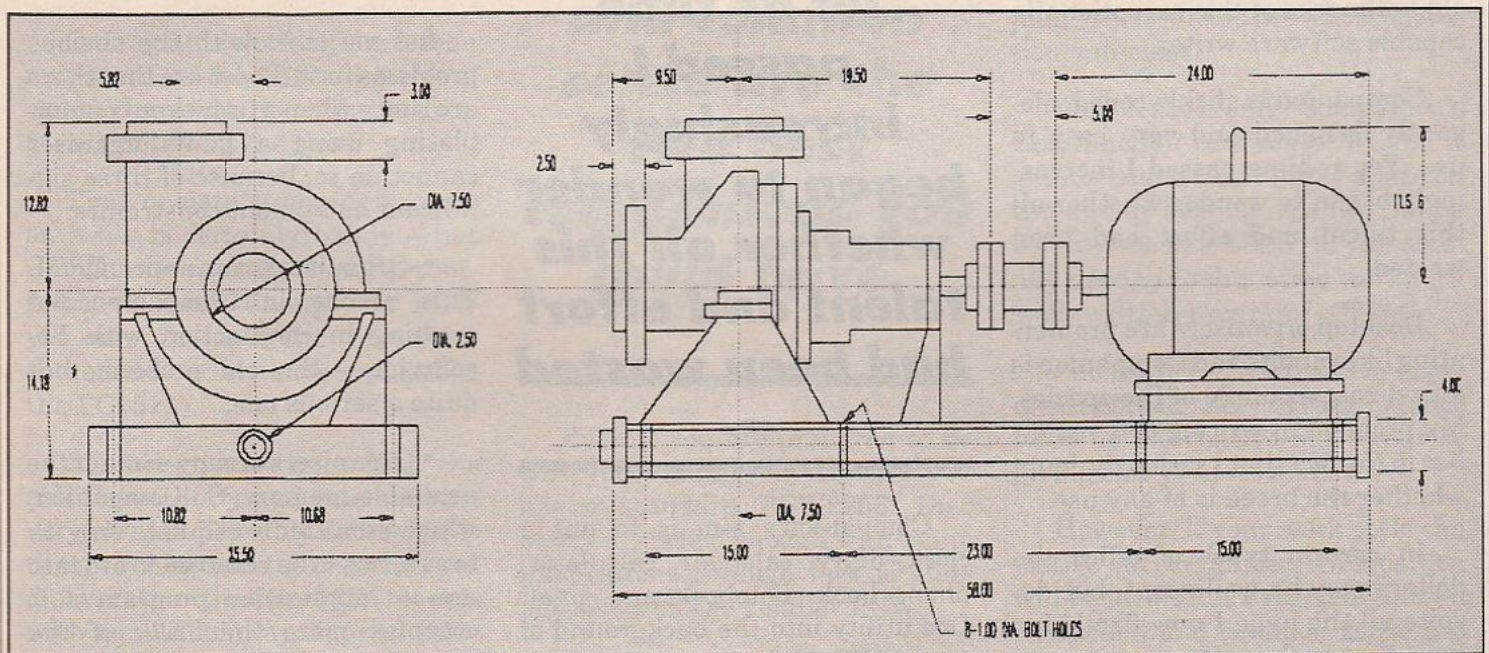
Figure IV: For many purposes good quality drawings can be produced on the PCW printer
